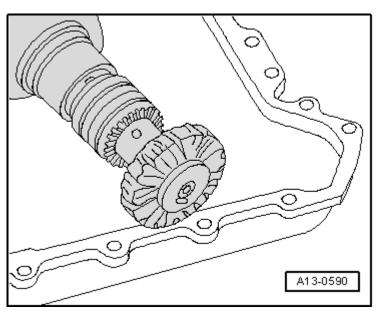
Identifying Rotating Plastic Brush To Remove Sealant Residue From Sealing Flange, Cylinder Block And Upper Part Of Oil Pan
